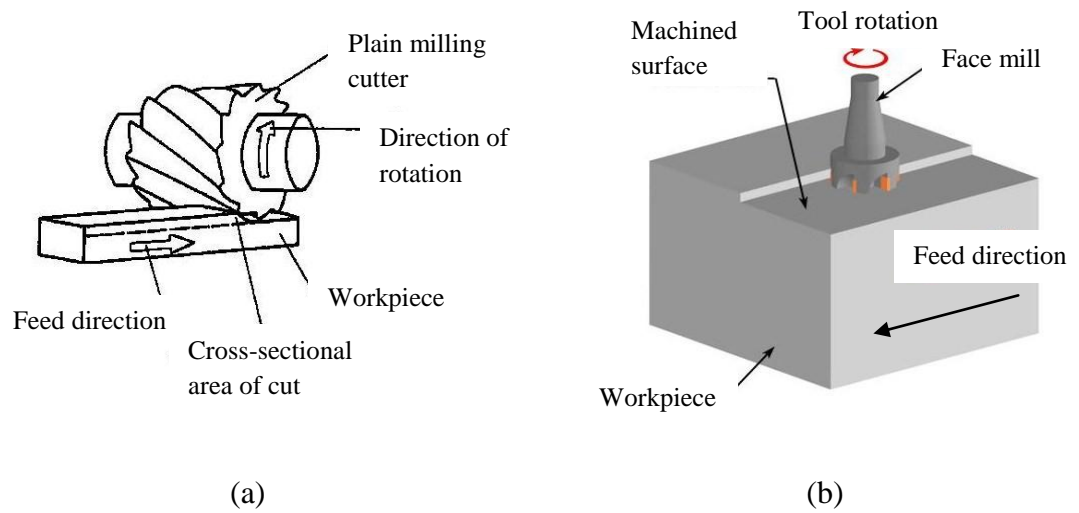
Machining operation (a) plain milling and (b) face mill
